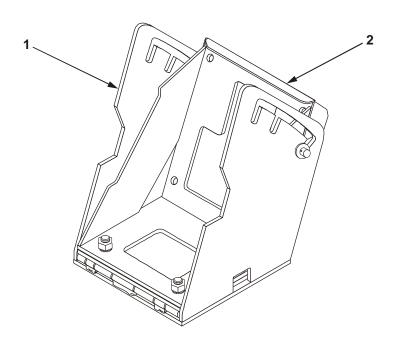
Elevation Bracket Assembly, PN 13-12-1127
